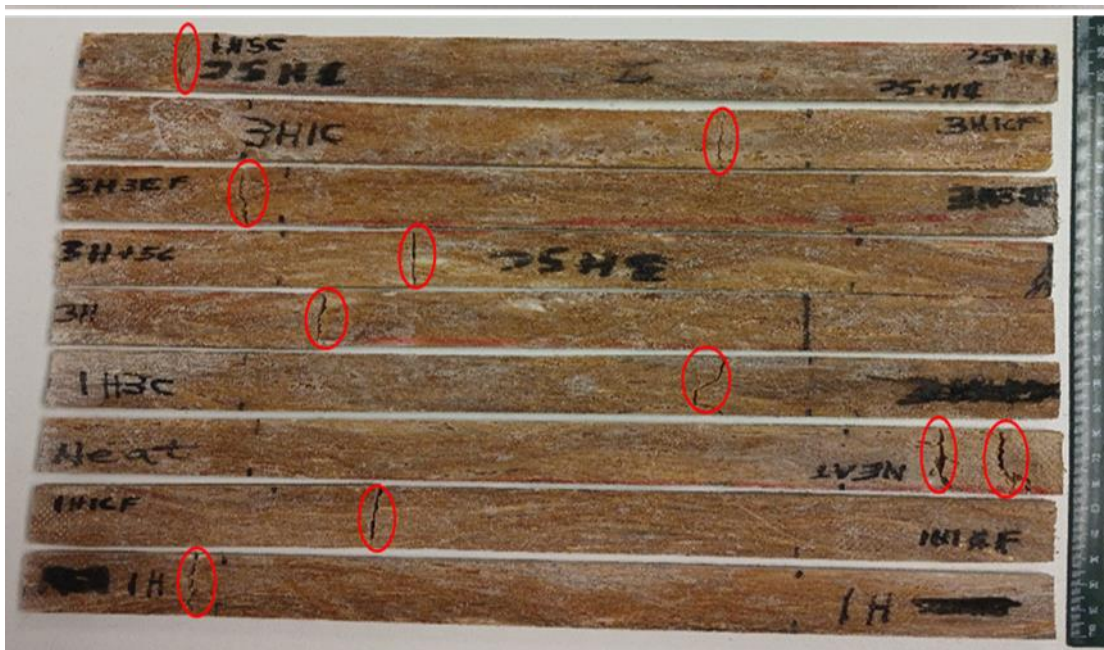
Tensile samples of sandwich composites filled with hybrid core after fracture
